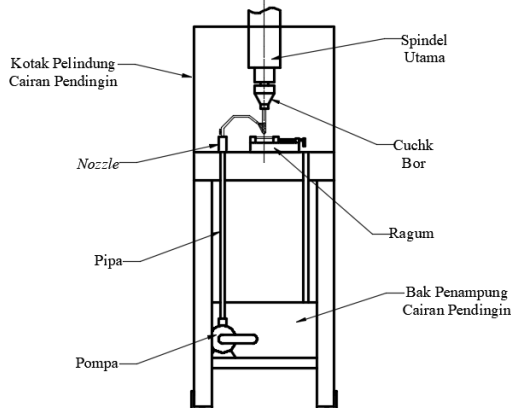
Schematic Drawing of IXION BT 25 Bench Drill Machine Design Cooling System
